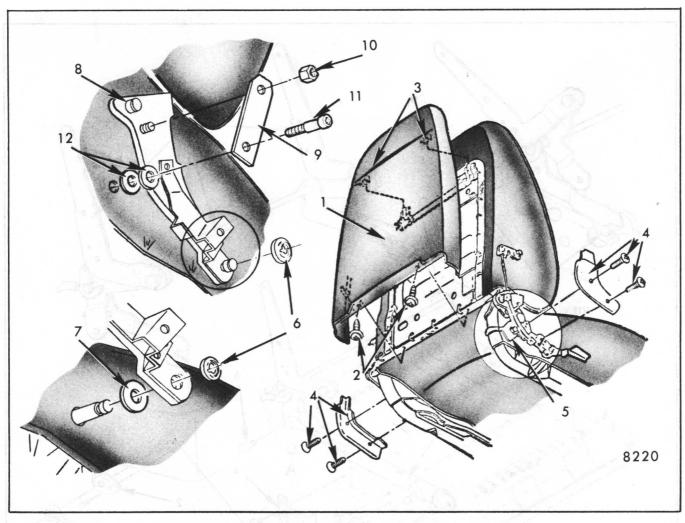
Custom Bucket Seat Back - Passenger Seat Shown
